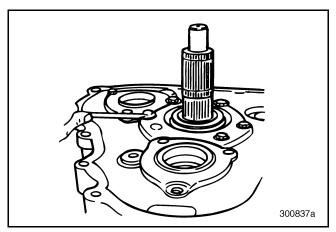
Removing Mainshaft Rear Bearing Cover Capscrews (T313L/T318L Shown)
